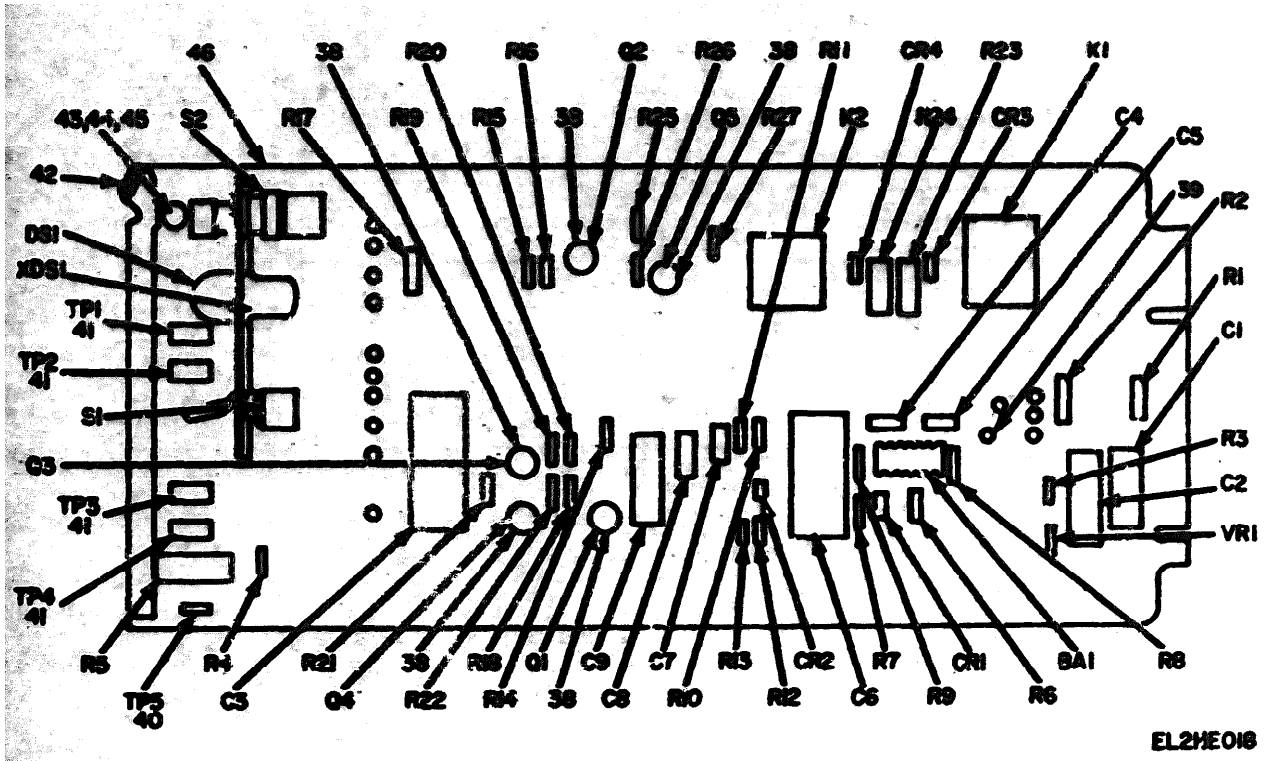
Circuit Card Assembly, Transfer and Alarm (Telesignal 62BA)
